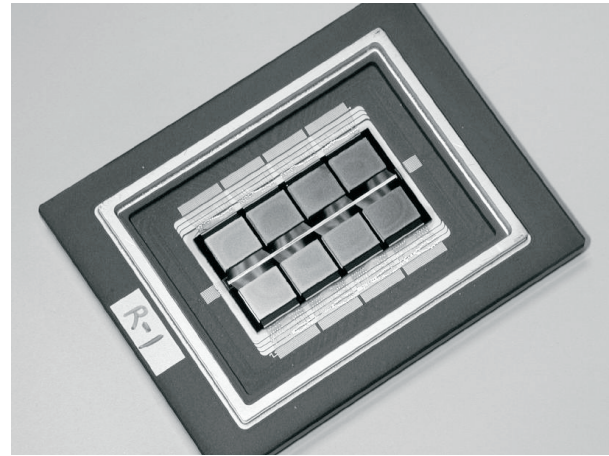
Photograph of the completed optical microsystem without the seam sealed lid. The strip in the middle of the assembly is the linear beam array.
